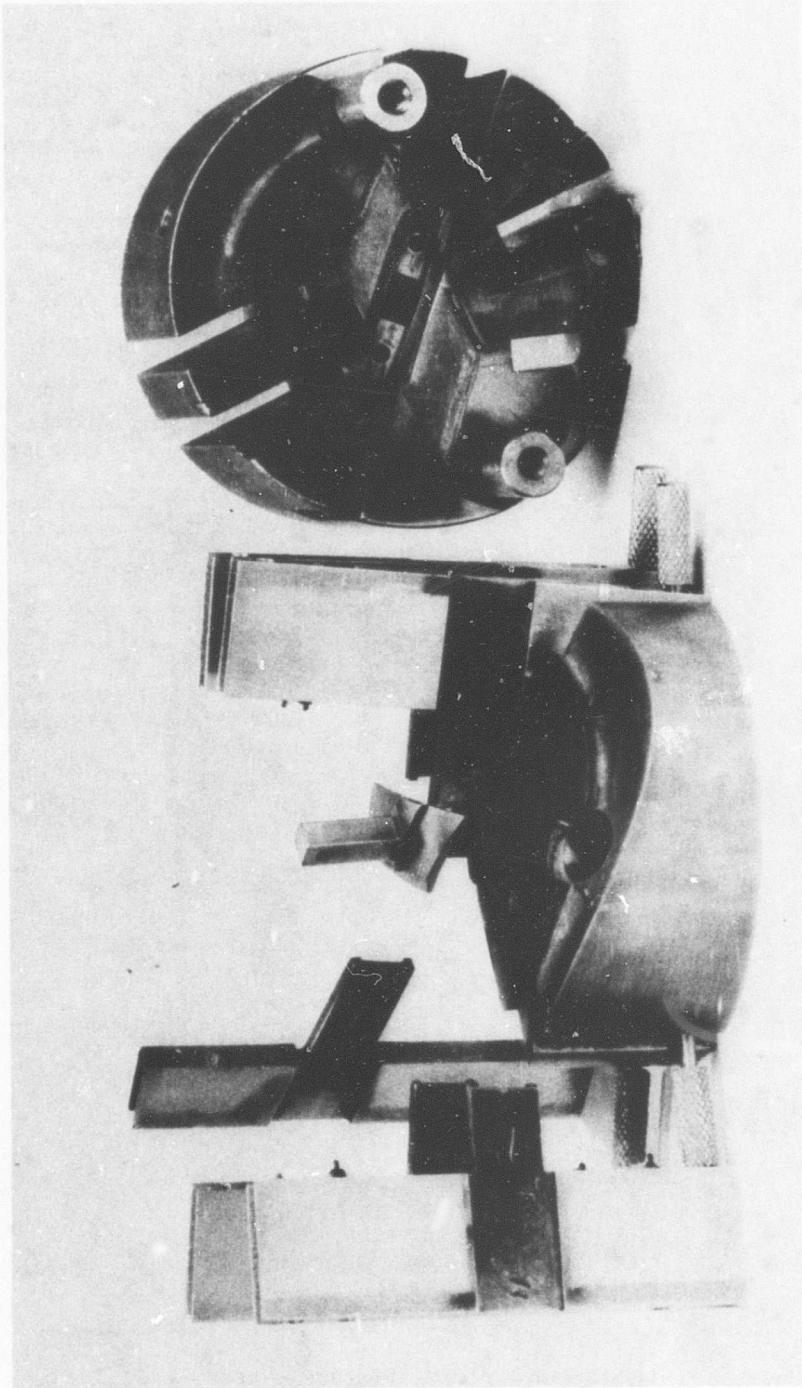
Stator Vane Welding Fixture - Disassembled.
